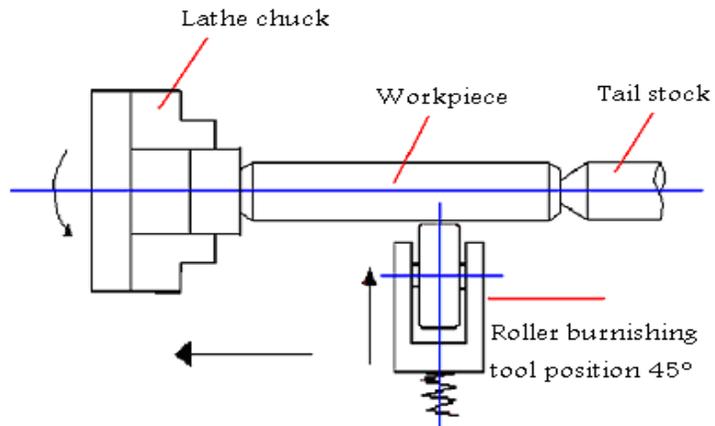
Detailed sectional view of roller burnishing tool assembly (Al-Qawabah *et al.*, 2010)
